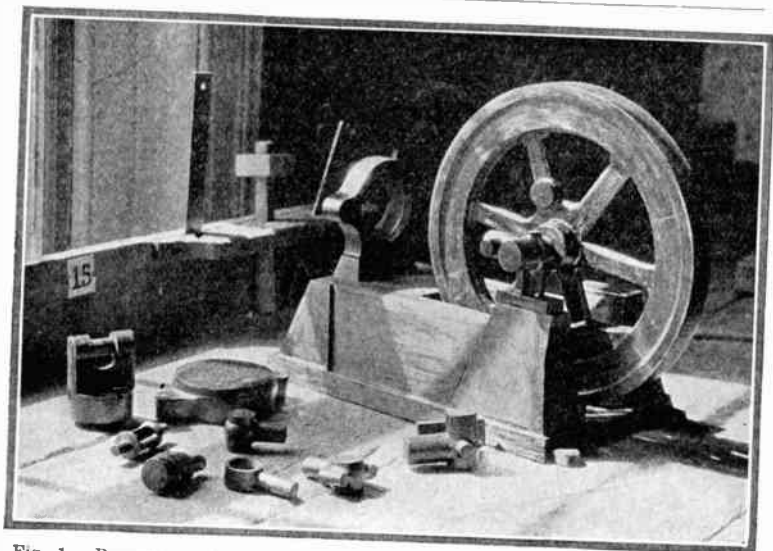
Patterns for the engine. The bedplate, bearings, wheel, cylinder collar, etc., are in the position they occupy in the finished engine
